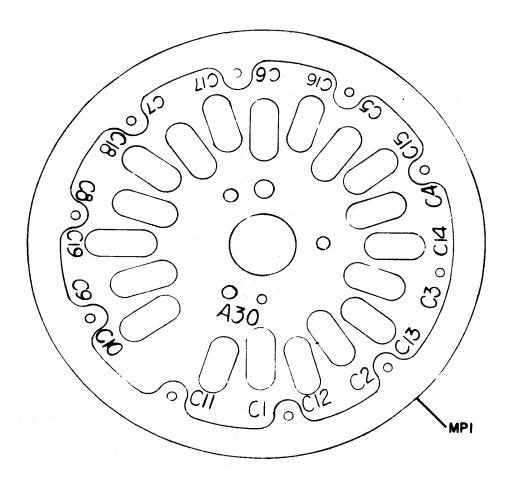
100 kHz Rotor Subassembly A2A4A30, Component Locations
